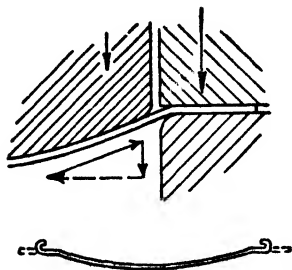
A relatively low drawing pressure but high blank-holding pressure is required in stretching a shallow shape.
